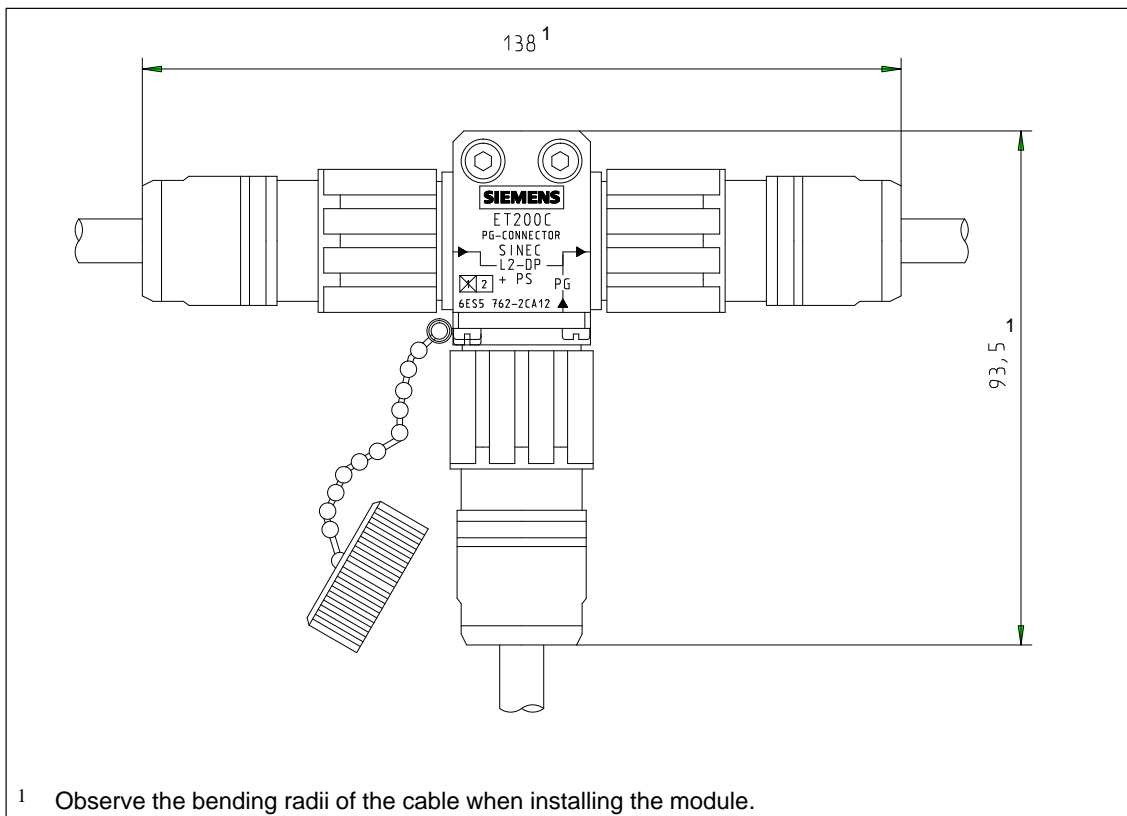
Programmer Connector: Dimension Drawing with Plug Connectors (with Pin/Socket Insert)
